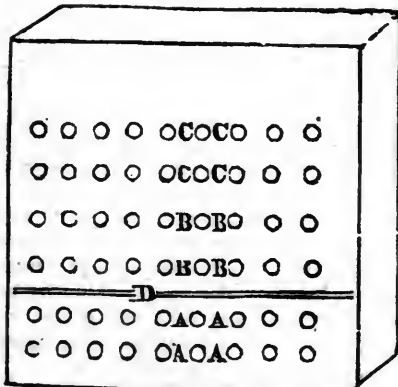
is a side view of the boiler A A B B., and C C, being the open end of the tubes through which the heated air from the furnace is to pass, as will be shown more
